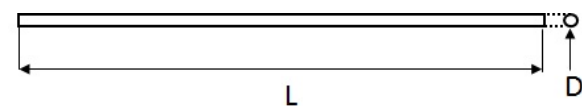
Wire specimen. L is 20 mm and D is 0.1 mm.
